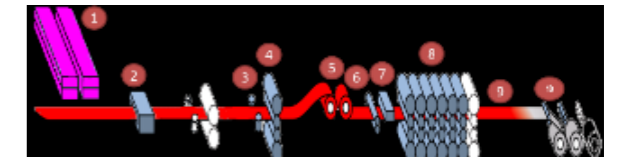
Flowchart: 1 – slab furnaces, 2 – hydraulic scale breaker, 3-edger, 4- roughing mill, 5 – coilbox, 6- rotary shear, 7- finish scale breaker, 8- finishing mill, 9- cooling units, 10 – downcoilers
